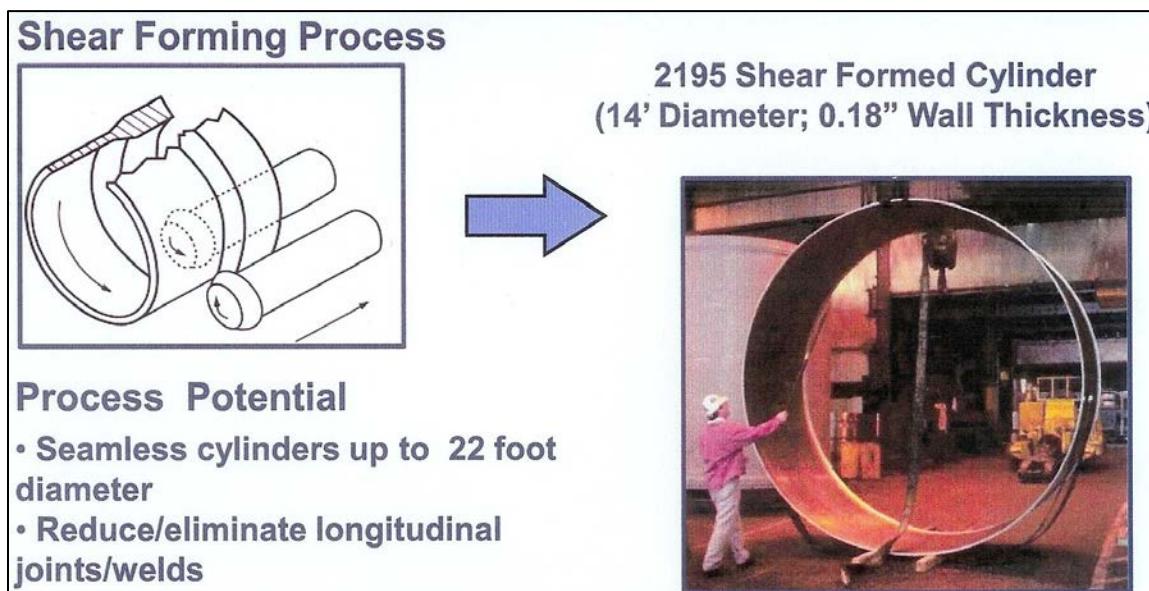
Example of the Shear Forming Process and a Shear Formed Cylinder Made From 2195.
